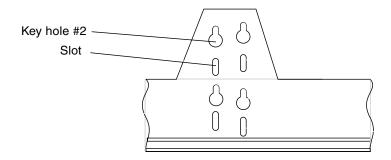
Sun Fire 3800 System Mounting Bracket Detail
